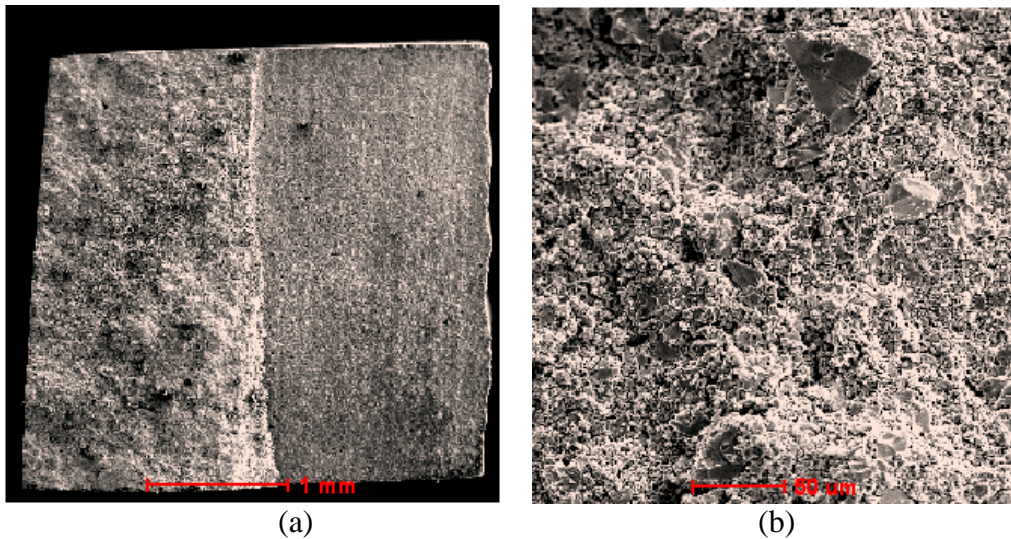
Fracture surfaces of a sample tested at 72% K_{Ic} . (a) 80x; (b) 400x.
